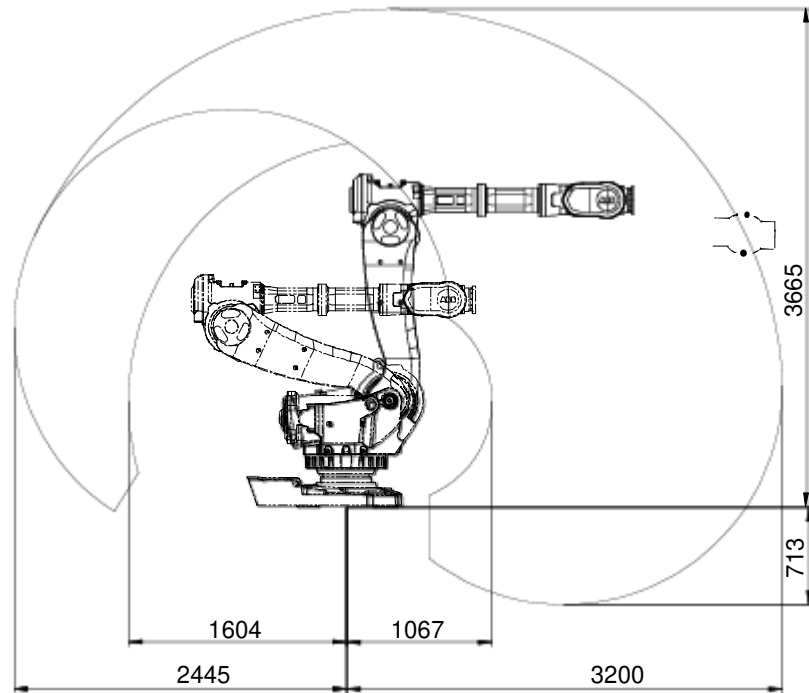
The extreme positions of the robot arm specified at the wrist center (dimensions in mm).
